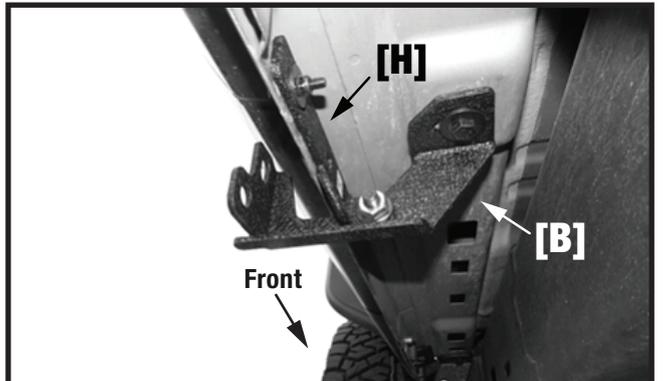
Locate the threaded inserts and holes in the pinch weld for center mounting location
